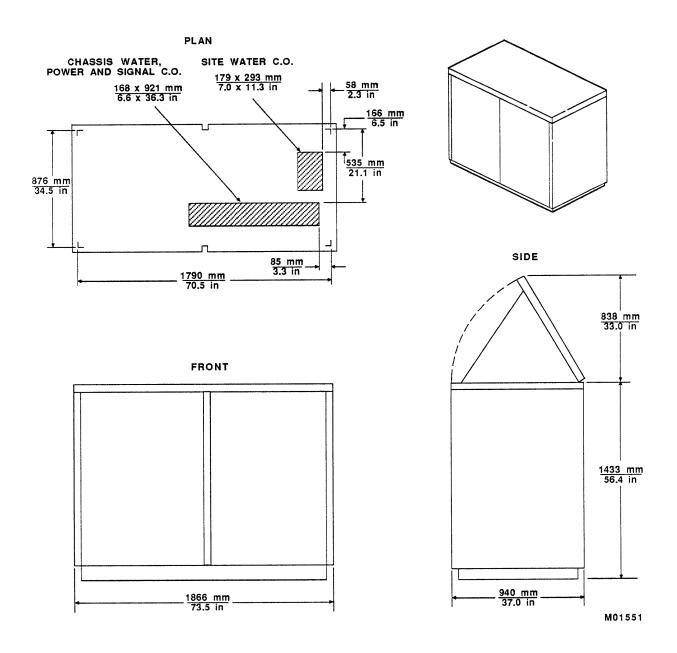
18675-1/3 Water Cooling Unit Dimensions
